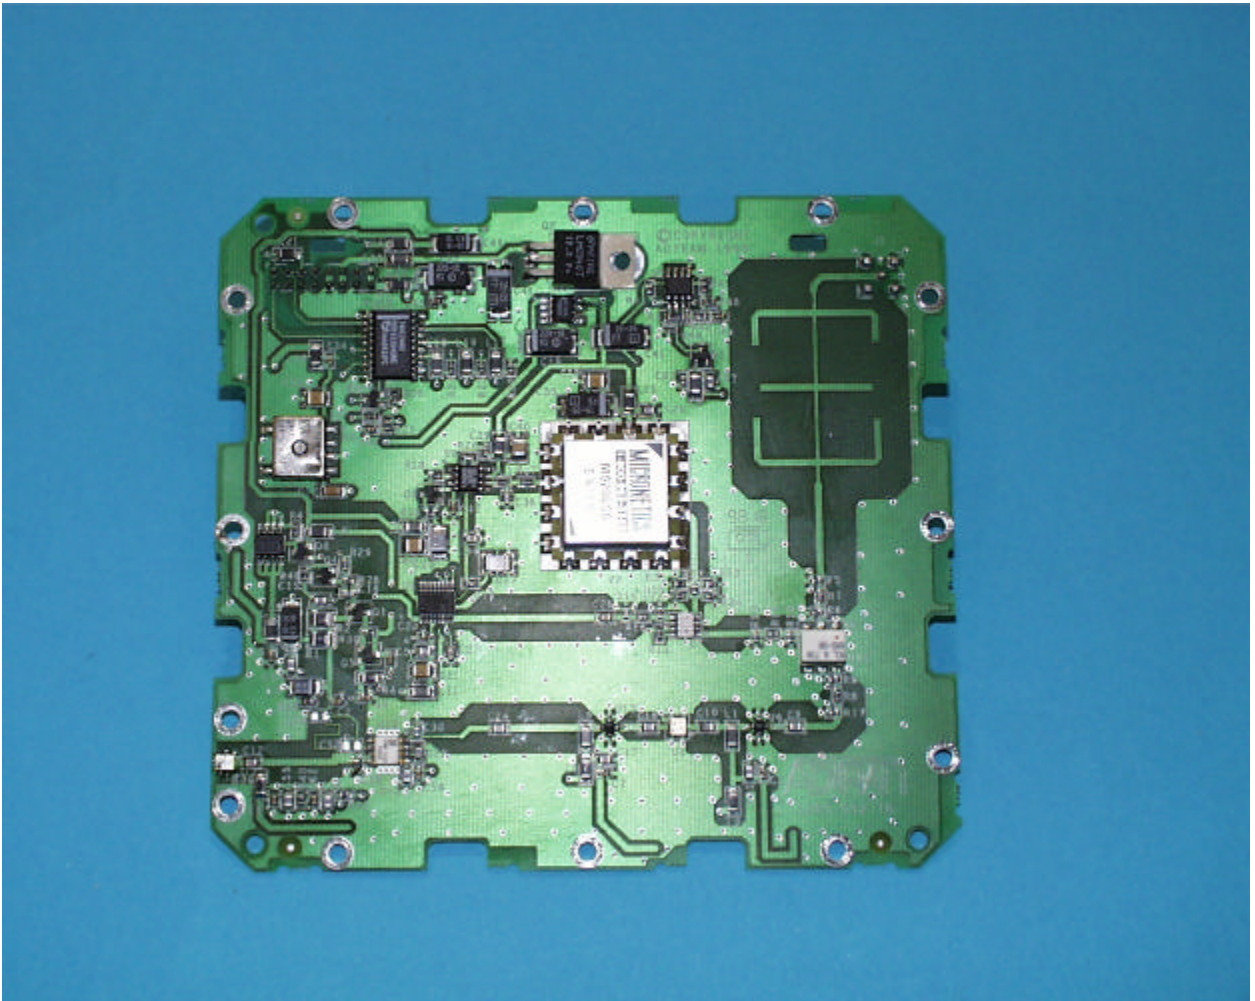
RF Assembly/RF2 PCB Bottom View
